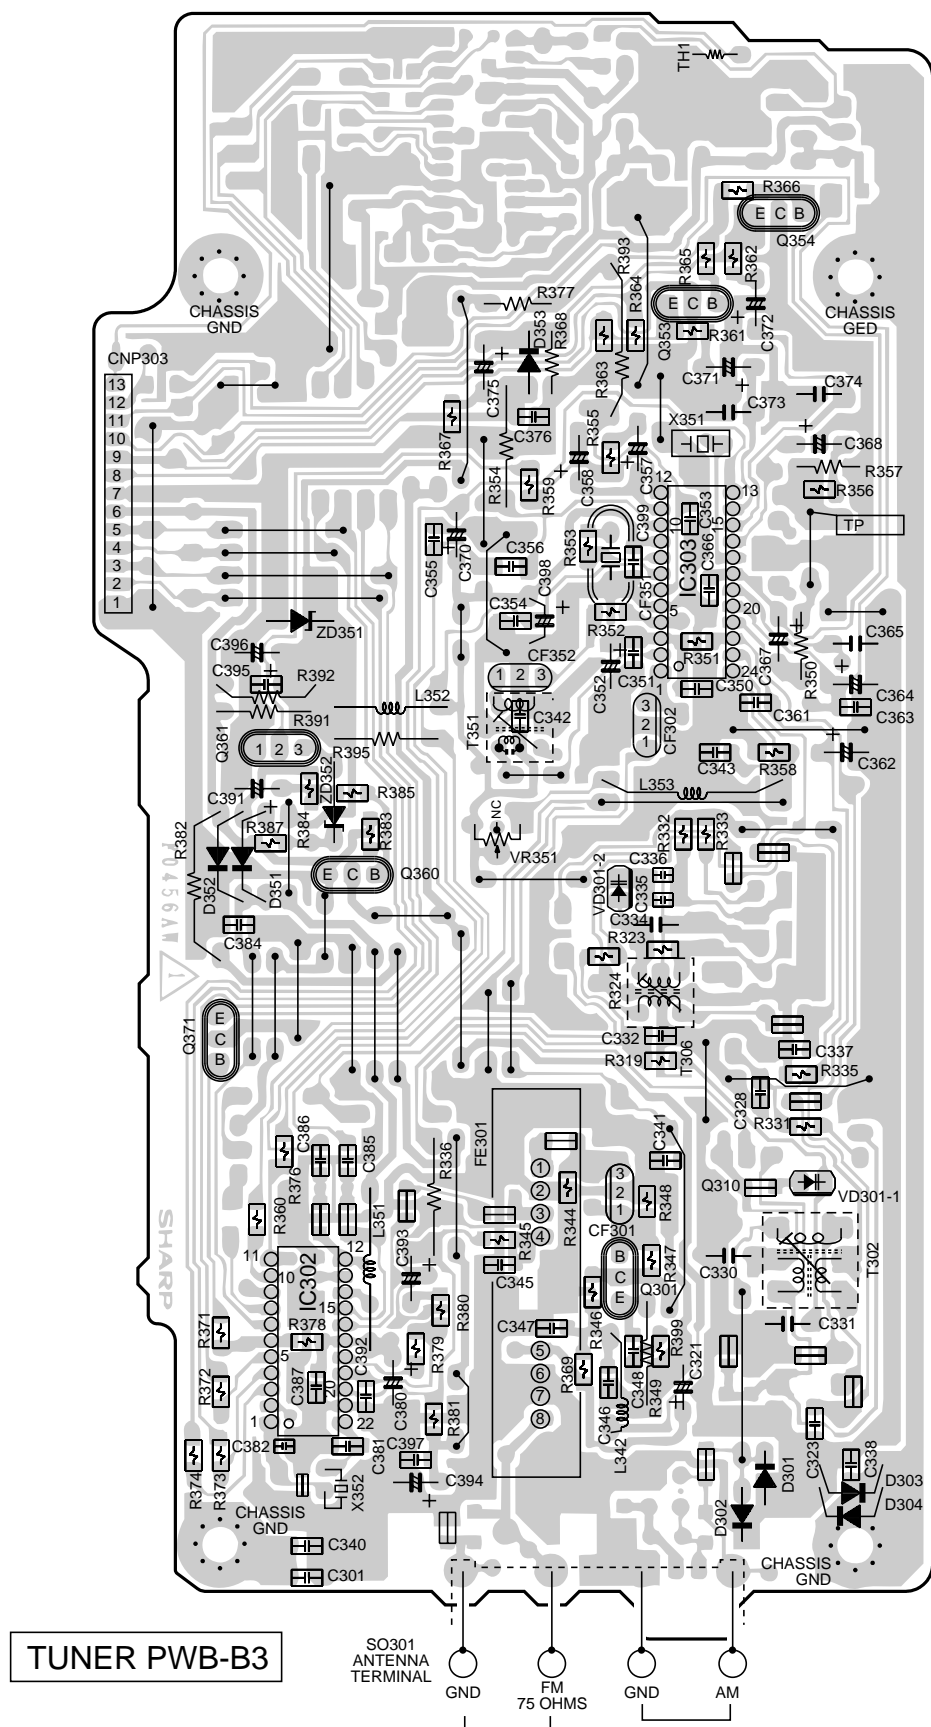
WIRING SIDE OF P.W.BOARD (11/11)
